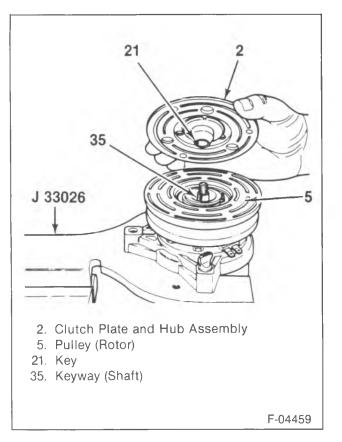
Positioning the Shaft Key, Clutch Plate, and Hub Assembly
